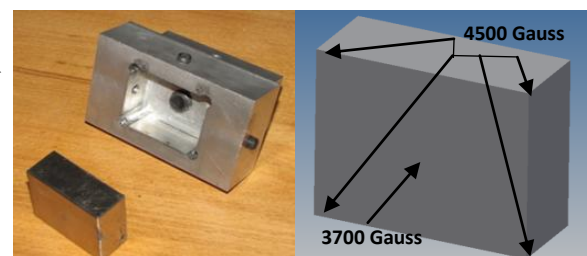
Nd-Fe-B magnet with the Aluminum holder fixture
